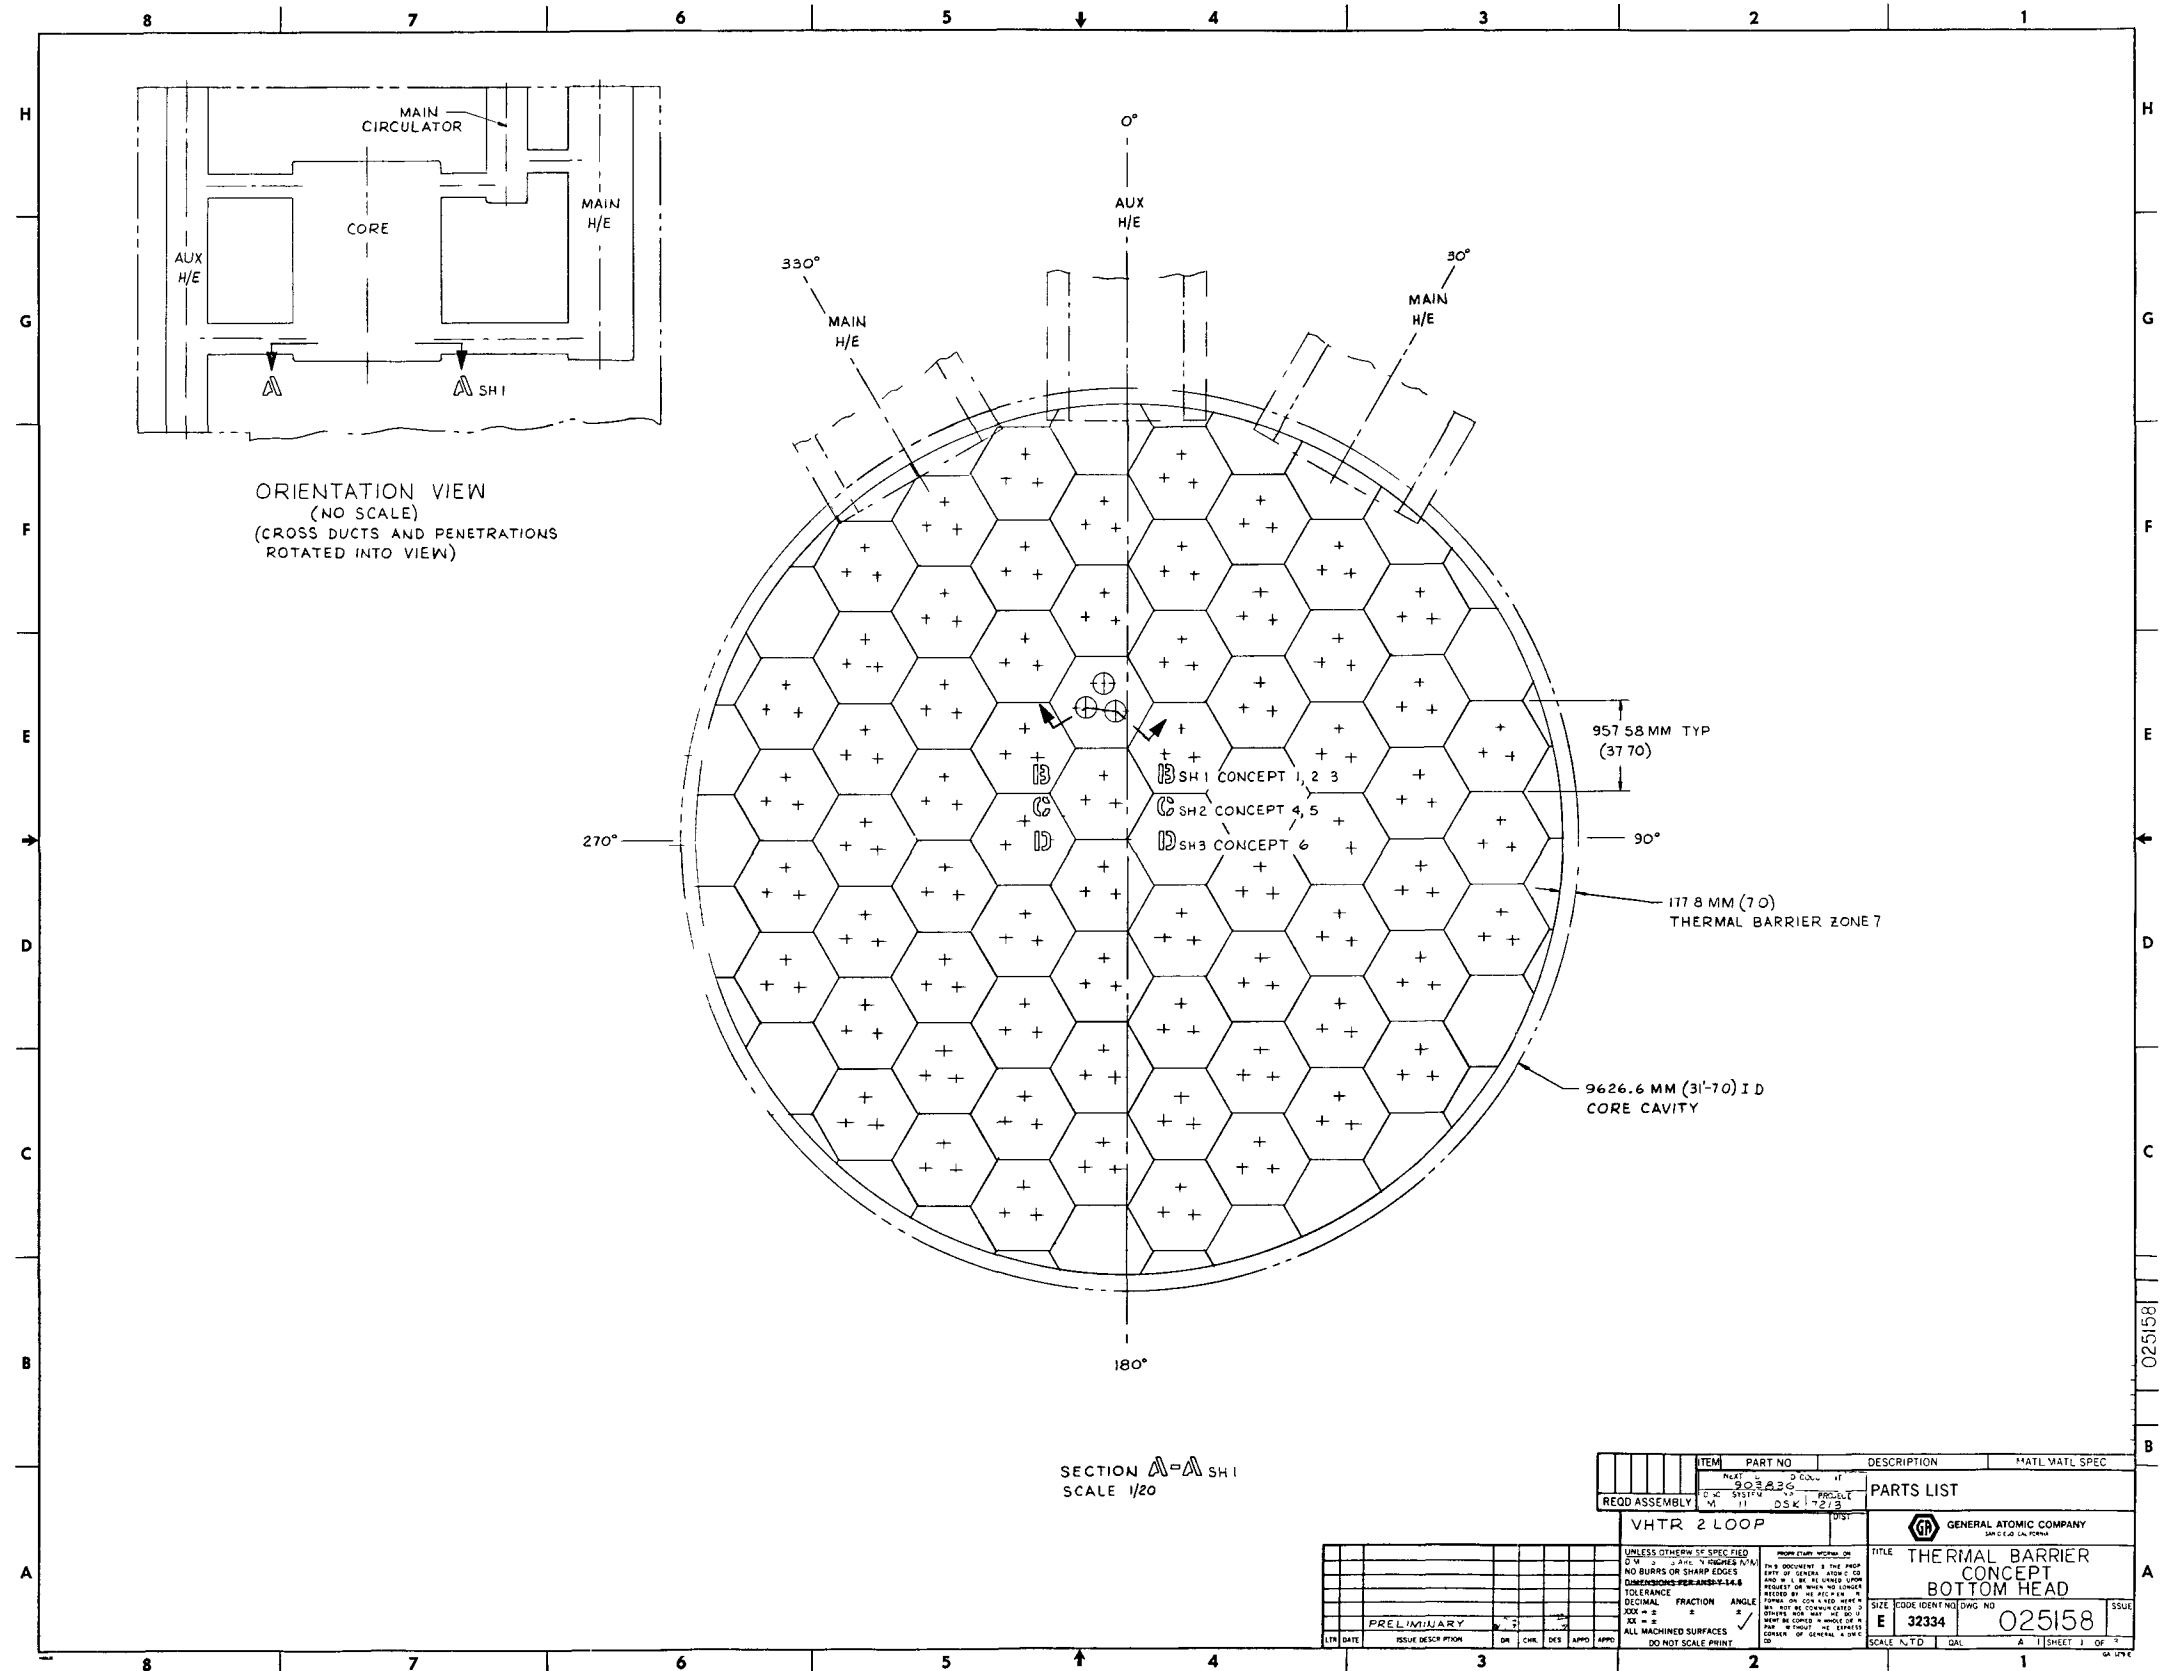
Thermal barrier bottom head (sheet 1 of 3)
